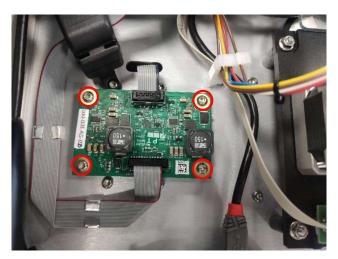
4x (T10 Torx) Anti-Stokes Driver PCB retaining screws.
